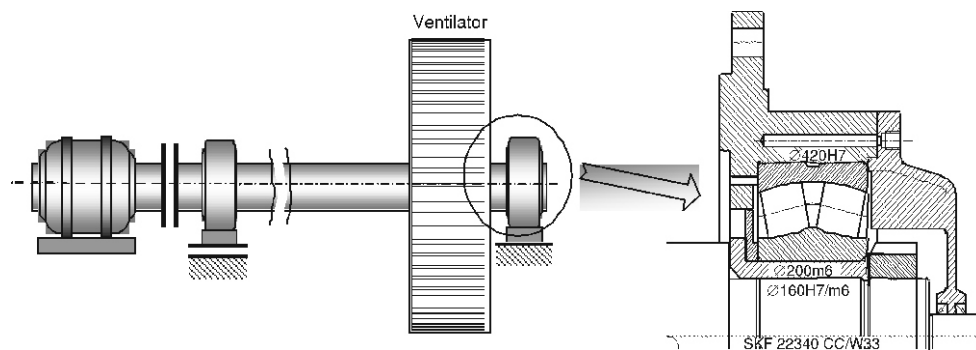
Cross-sections of the bearing bedding SKF 22340 CC/W33
